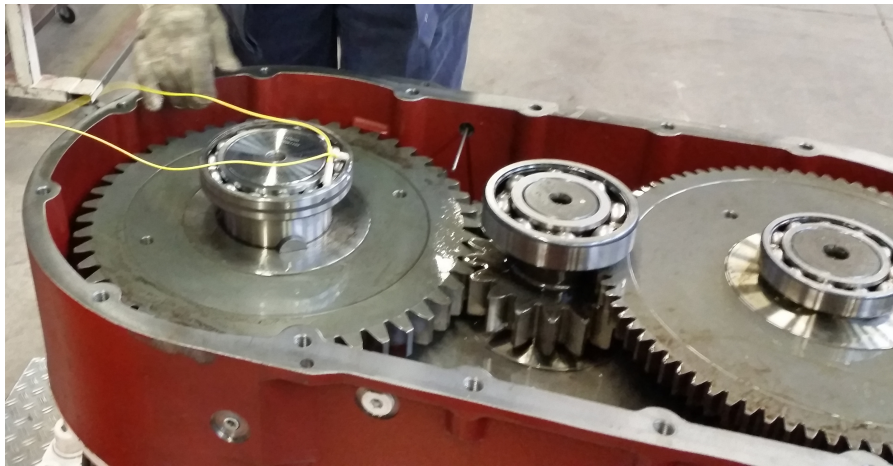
Jacking system gearbox with sensorized bearing installed
